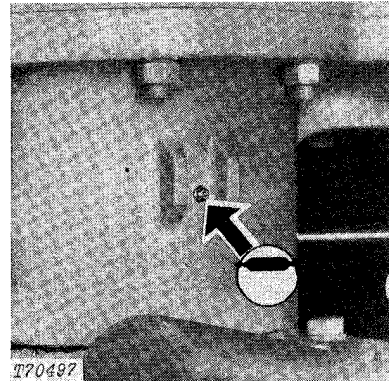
Left Feed Roll Final Drive Main Housing Pivot (1 Point)
